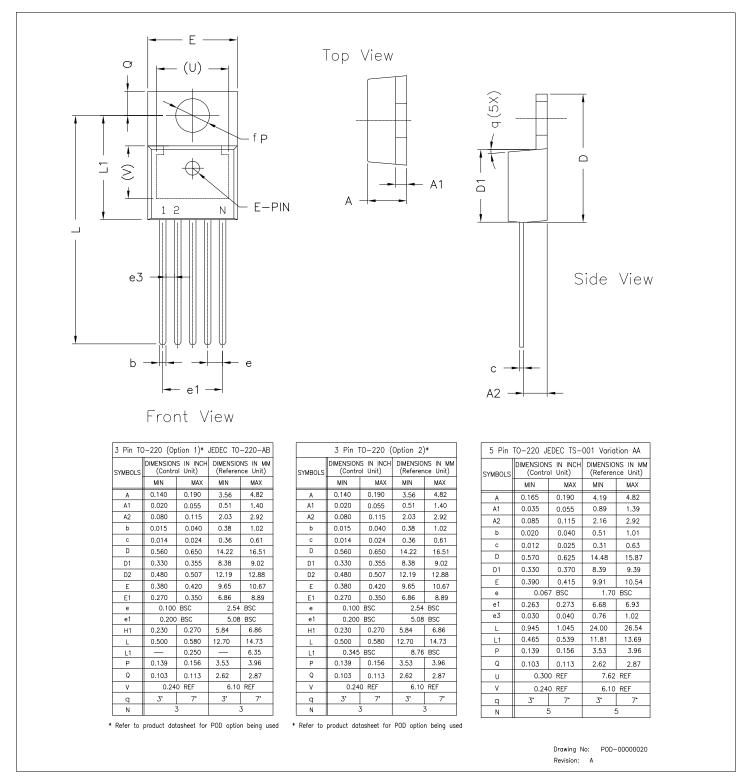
SPX2945 Mechanical Dimensions–5-Pin TO-220
